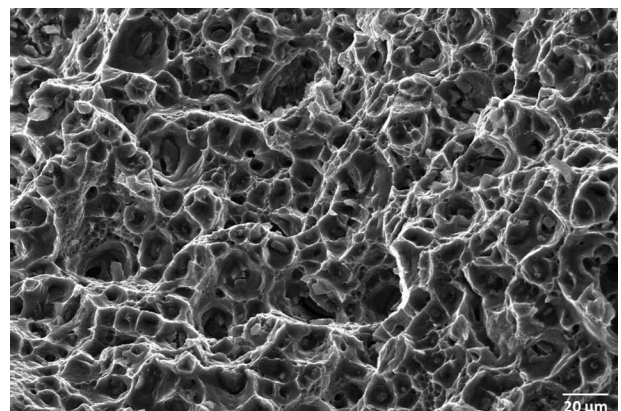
Fracture surface of room temperature tensile-tested aluminum alloy AA 2014 forged bar in T6 condition. Note equiaxed dimples throughout the specimen
